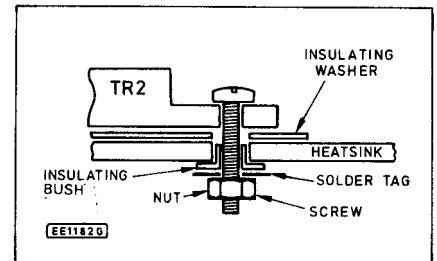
Details of mounting the MOSFET device on the heatsink.
